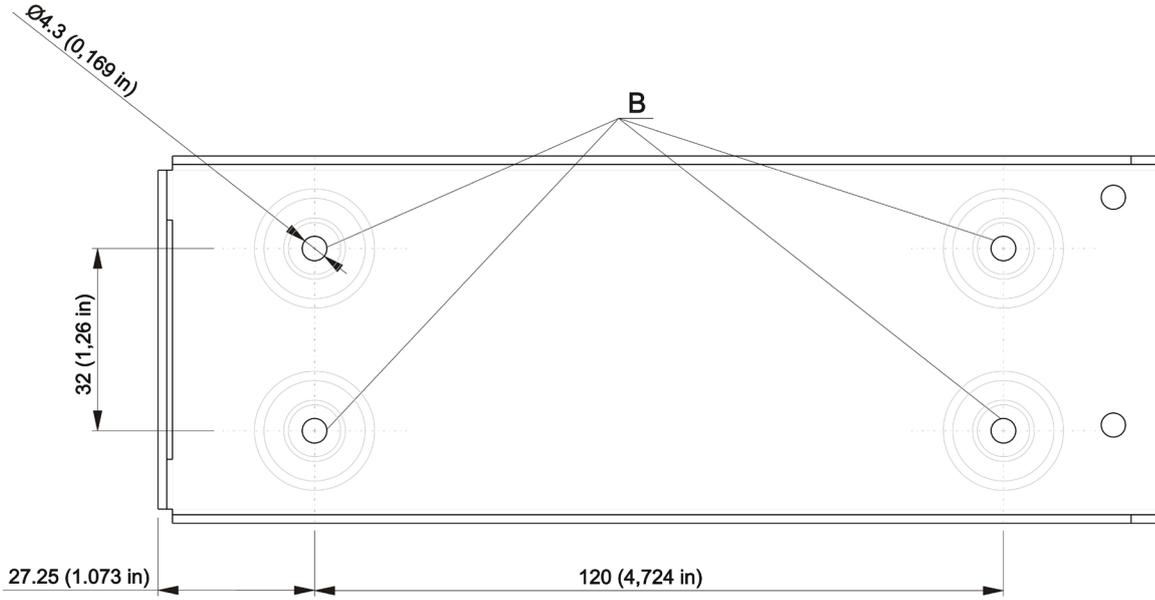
Dimensions Mounting kit MK6201-(010)
